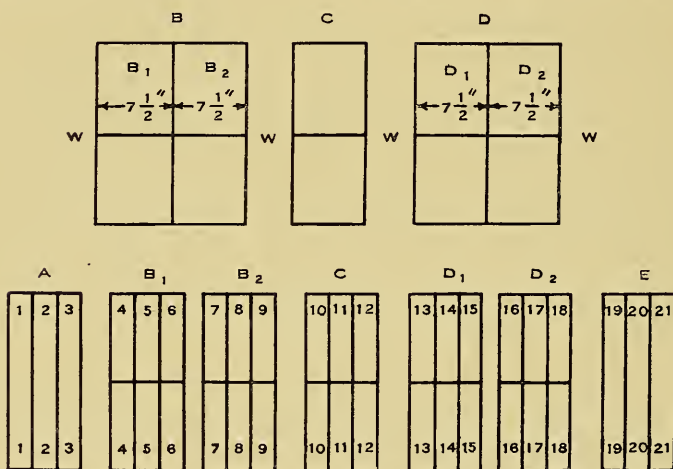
PLAN OF WELDING AND CUTTING TEST PLATES AND PANELS
